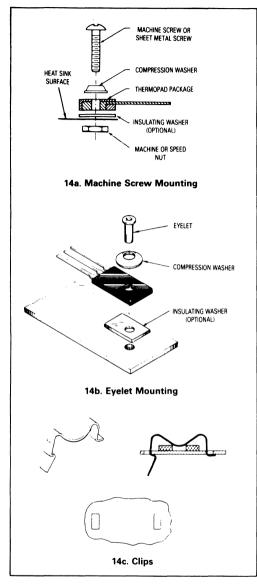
Recommended Mounting Arrangements for TO-225AA (TO-126) Thermopad Packages
